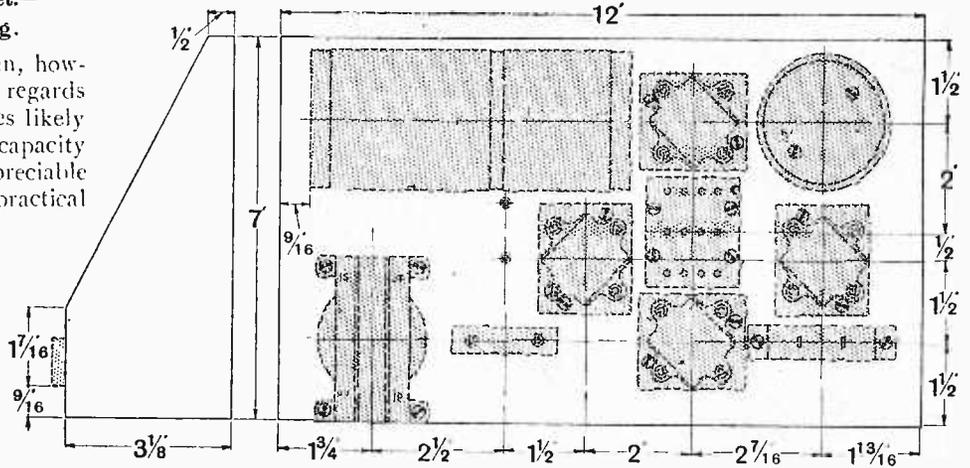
Dimensional drawings showing the relative positions of the component parts.
